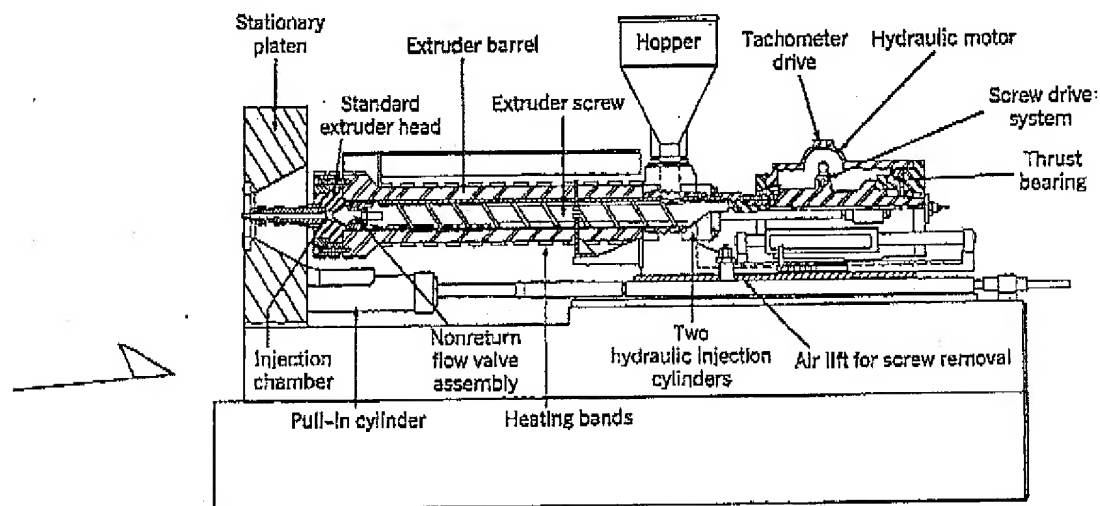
Reciprocating-screw machine, injection end. Courtesy of HPM Division of Koehring Company.
